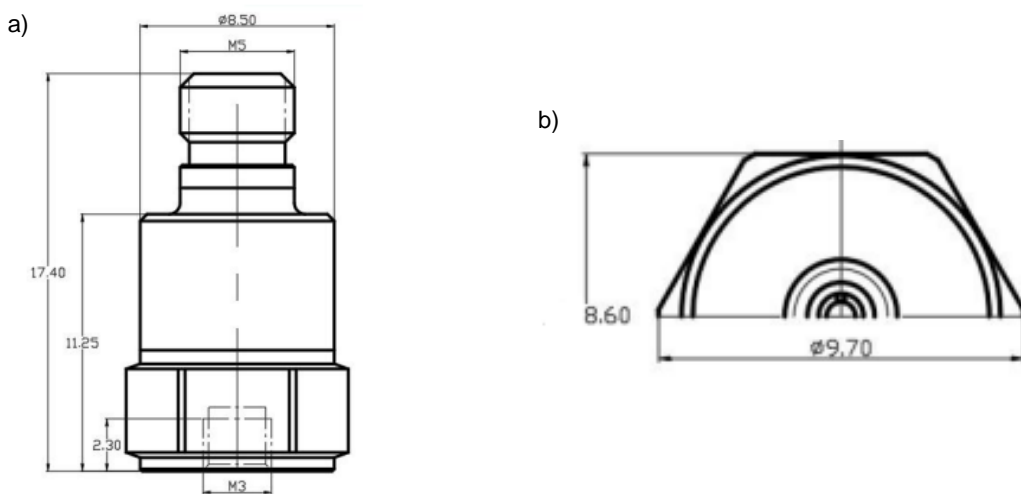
Mechanical Dimension SSA-P9UCB1 a) side view b) top view
